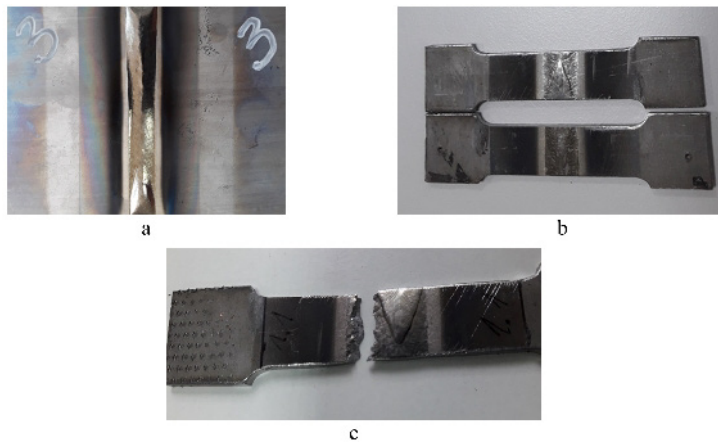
General appearance of produced welds (a); specimens for tensile testing (b); fractured after tensile testing specimen (c)
